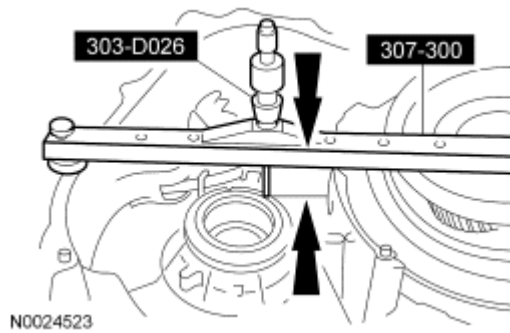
Measuring Distance From Top Of Special Tool To No. 12 Driven Sprocket Bearing Surface Area
